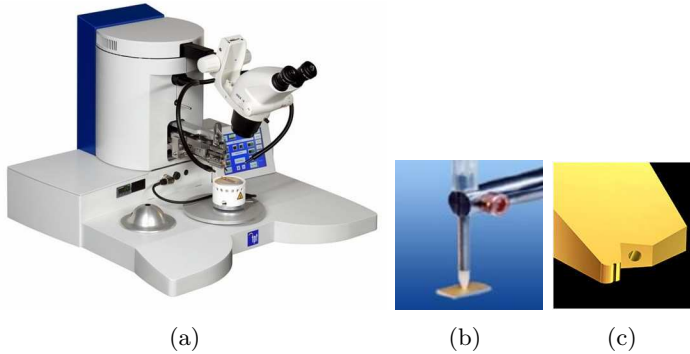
Photographs of the a) TPT HB16D machine, b) vacuum pencil of the pick and place tool and c) a detail of the 25 μm wedge wire bonding tool.
